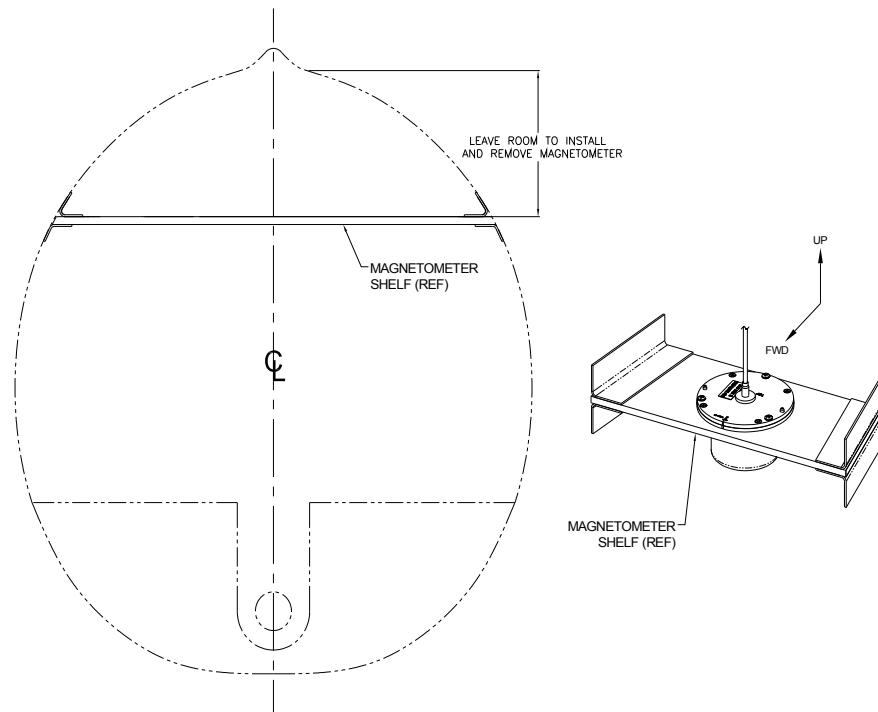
View Looking AFT At Recommended Magnetometer Location
